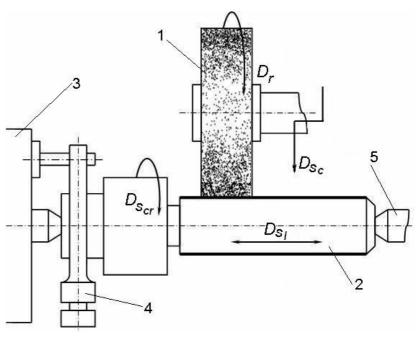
Circular grinding: 1 – grinding wheel; 2 – work-piece; 3 – driver chuck; 4 – carrier; 5 – tail centre
